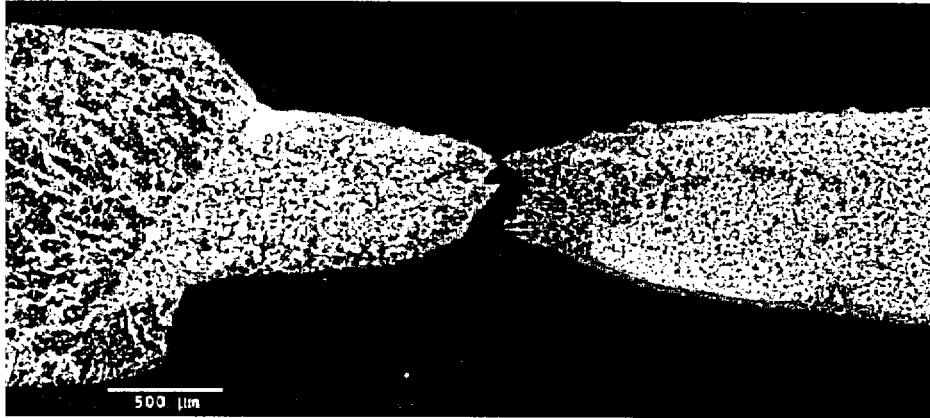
Metallographic cross section of tear #2-1. Tearing occurred in heat affected zone adjacent to repair weld. Note how grinding ends abruptly at edge of fusion zone, providing for measurement of as-ground liner thickness at edge of weld and close to location of tear. Tearing occurred in the adjacent heat affected zone.
